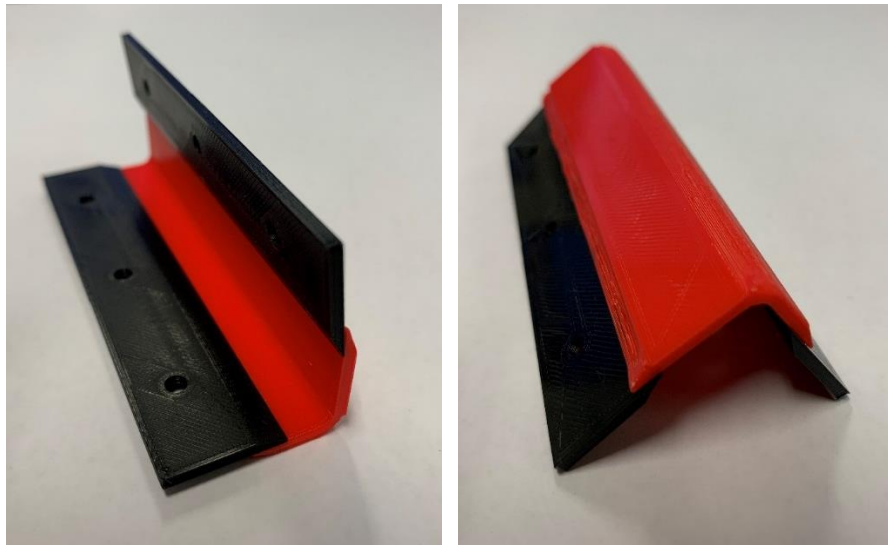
3D printed demonstrator for the Star Tracker Bracket design
